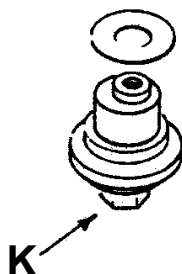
A swivel mount is available for mounting the Weaver so that it can pivot around 2 axis. This enables it to make fillet weld or other angled-weave welds. The swivel mount bolts to the carriage and the Weaver in turn bolts to the swivel mount.
